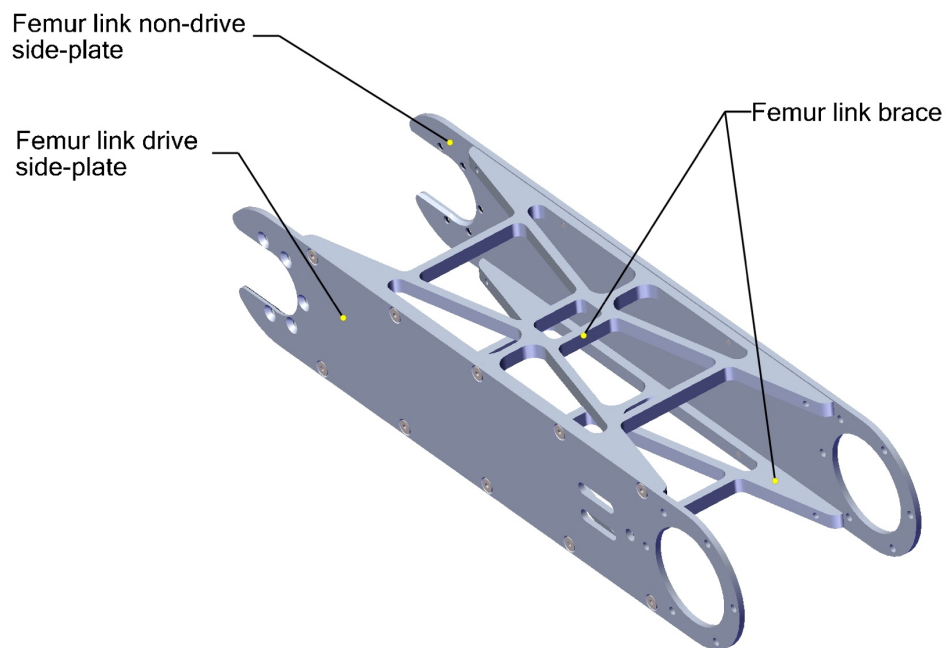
Parts of the Femur link. (Render from SolidWorks Composer).
